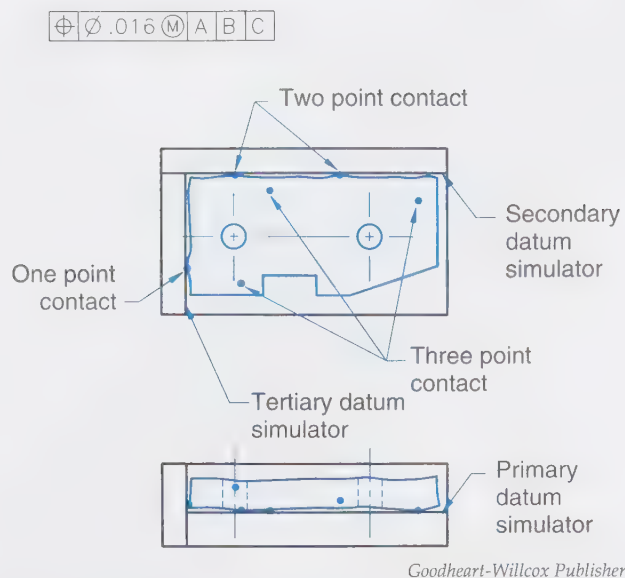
The specified order of precedence sets the requirements for how the workpiece must be located in the datum reference frame.
